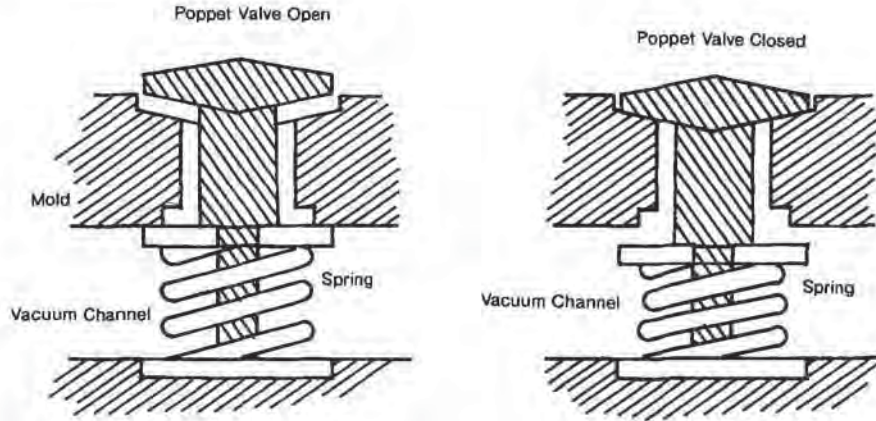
Spring-loaded poppet valve for evacuating large-volume or deep female mold cavities
